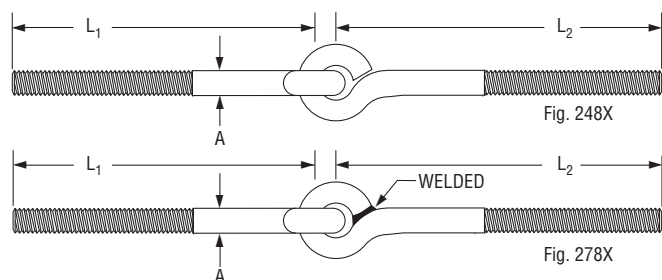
X, 278X: Dimensions (in) • Loads (lbs)
